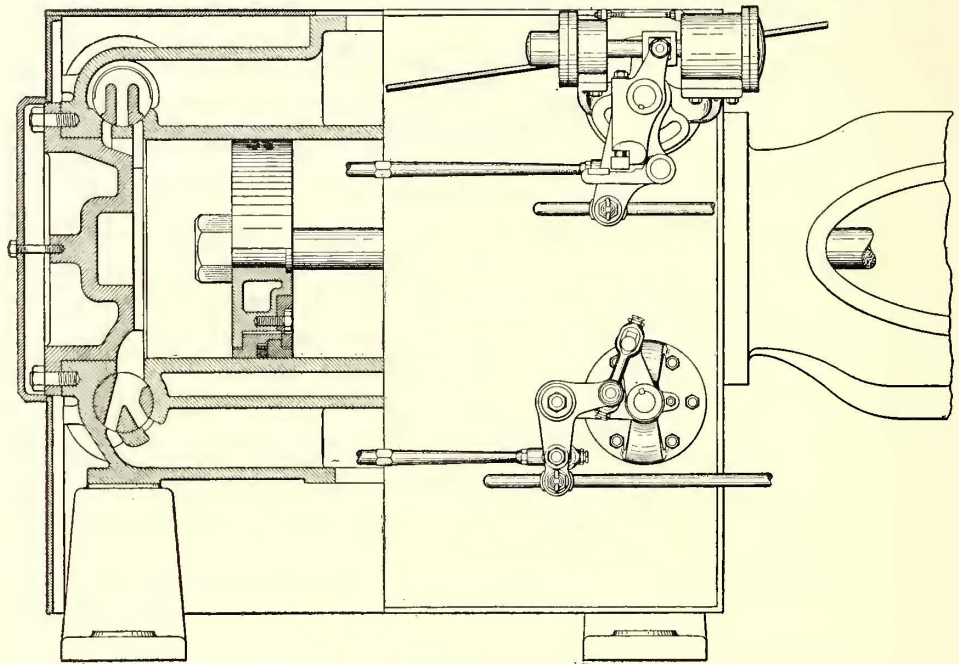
HALF SECTION OF CYLINDER AND SIDE ELEVATION OF VALVE GEAR
